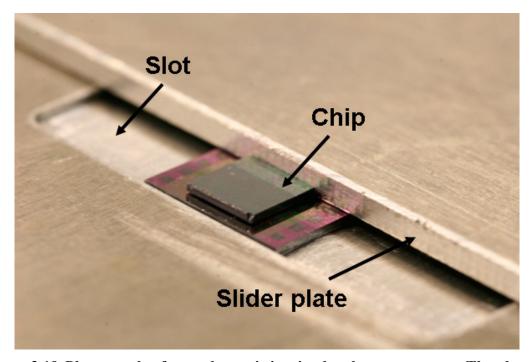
Photograph of a package sitting in the shear test setup. The slot and slider plate apply the shear force perpendicular to the package cap edge.
